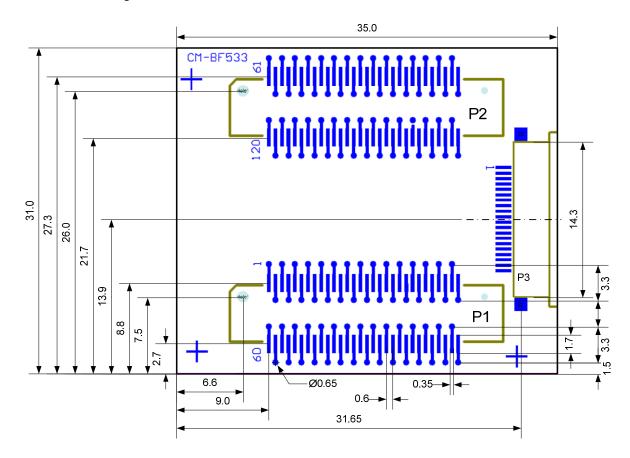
Mechanical outline and Bottom Connectors (Top-View)
